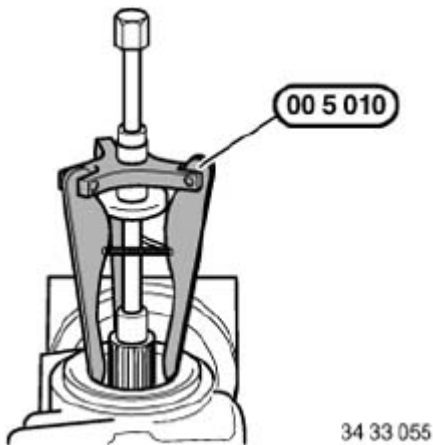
Identifying Special Tool (00 5 010) On Shaft Seal
